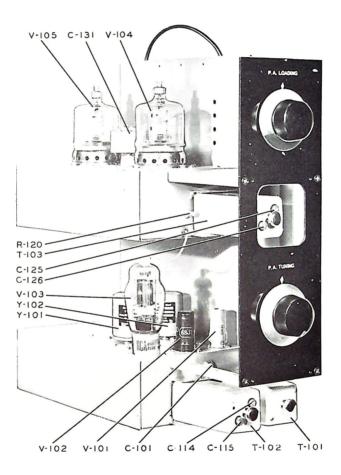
Driver Cabinet R-F Chassis, Top View
